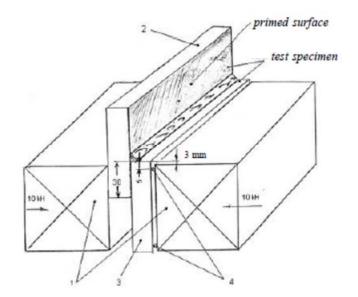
A standard test specimen for pore formation with a control weld:
